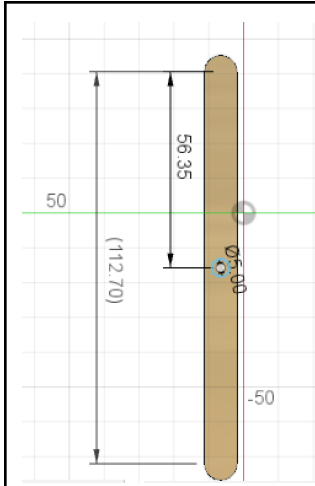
Hole tapped in the middle of the tongue depressor. The diameter of the hole is approximately 5mm but does not need to be exact, as it depends on the screwdriver used to tap and just needs to be large enough to insert the motor shaft.
